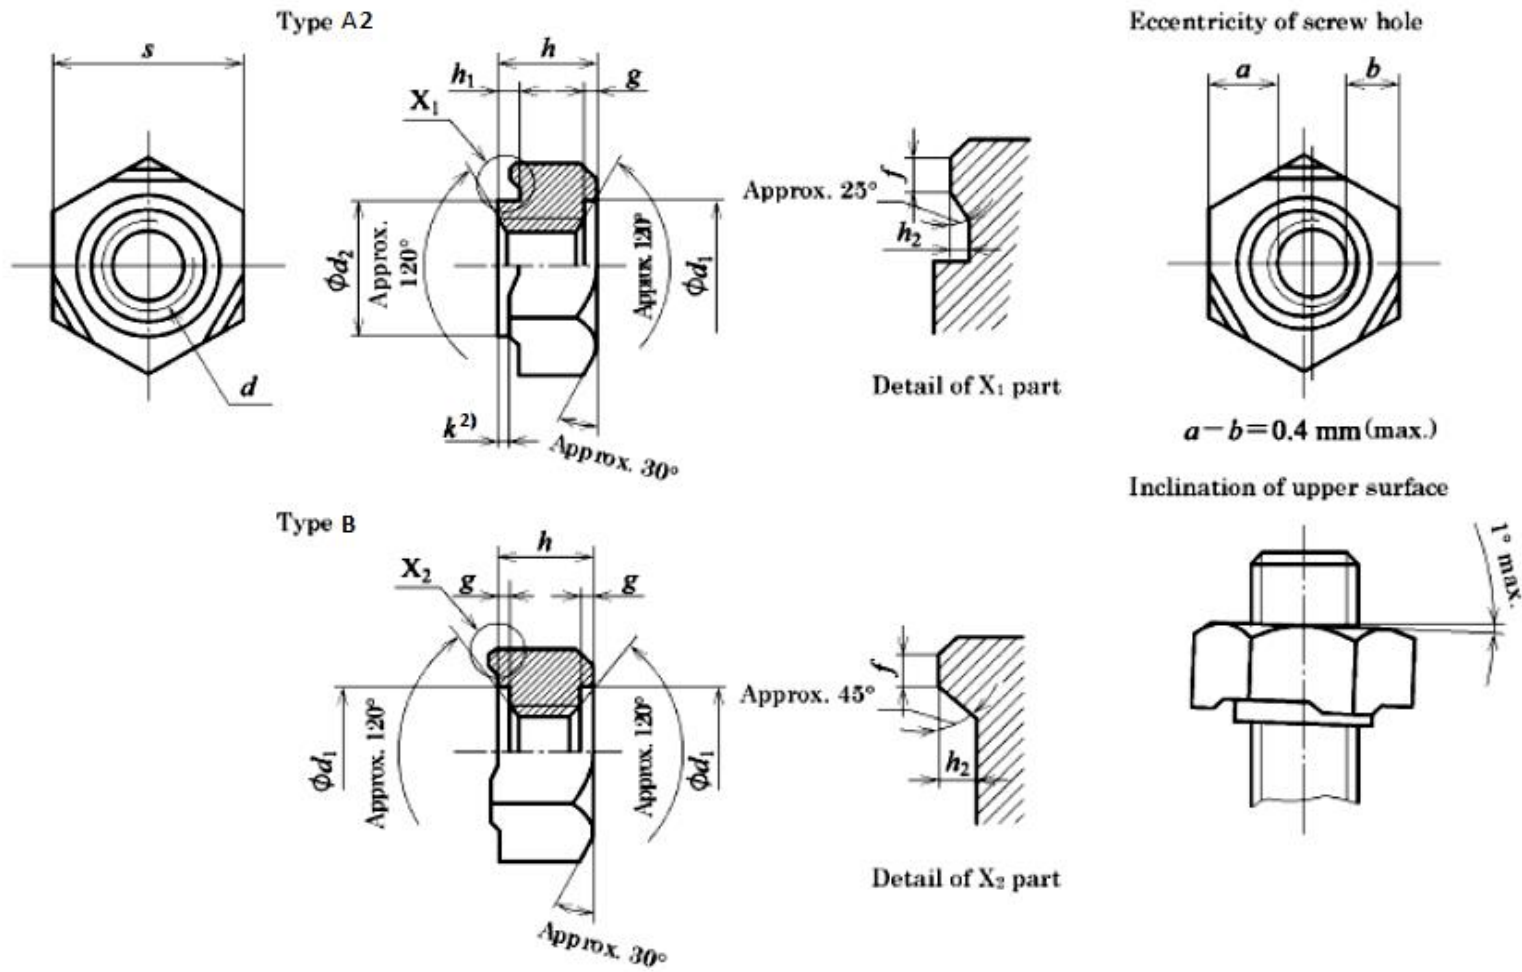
DIMENSIONS OF HEXAGONAL WELD NUTS (TYPE A2 AND B)
